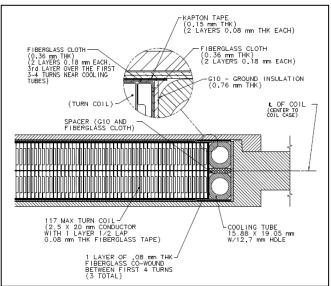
Construction detail for the Torus coils, showing conduction cooling mechanism and coil winding details. The coil cross section inside of the aluminum case is 353×45 mm.
